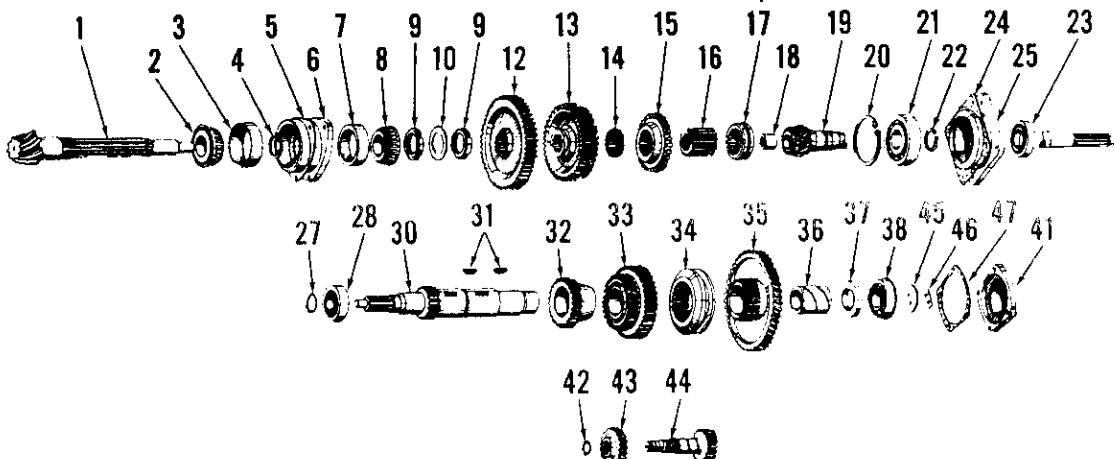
Exploded view of the transmission shafts, gears and component parts used when tractor is equipped with transmission driven pto (single plate clutch). Note the solid countershaft (30). Refer also to Fig. 108.
